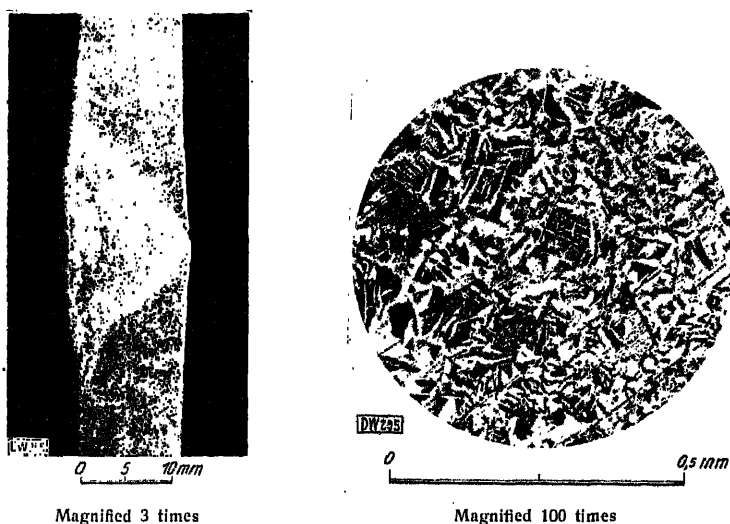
Microphotographs of welded joint and structure of the transition zone of a live steam pipe of S.M. steel
